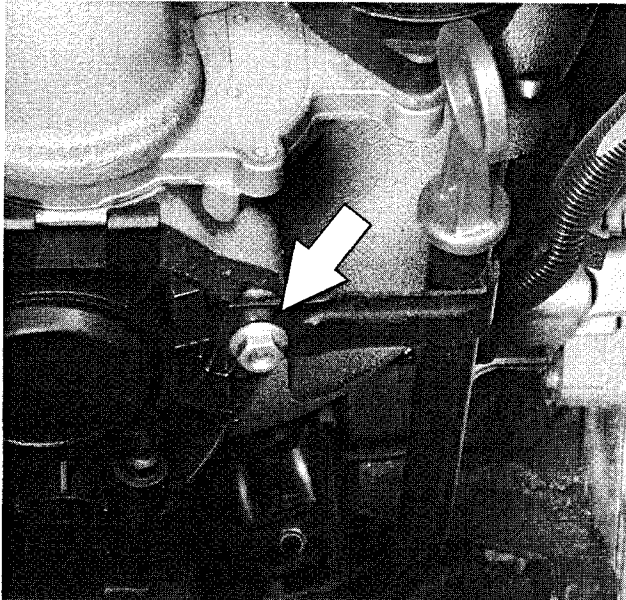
Oil dipstick guide tube mounting nut (arrow) on M44 engine. Use new O-ring at base of tube during installation.
